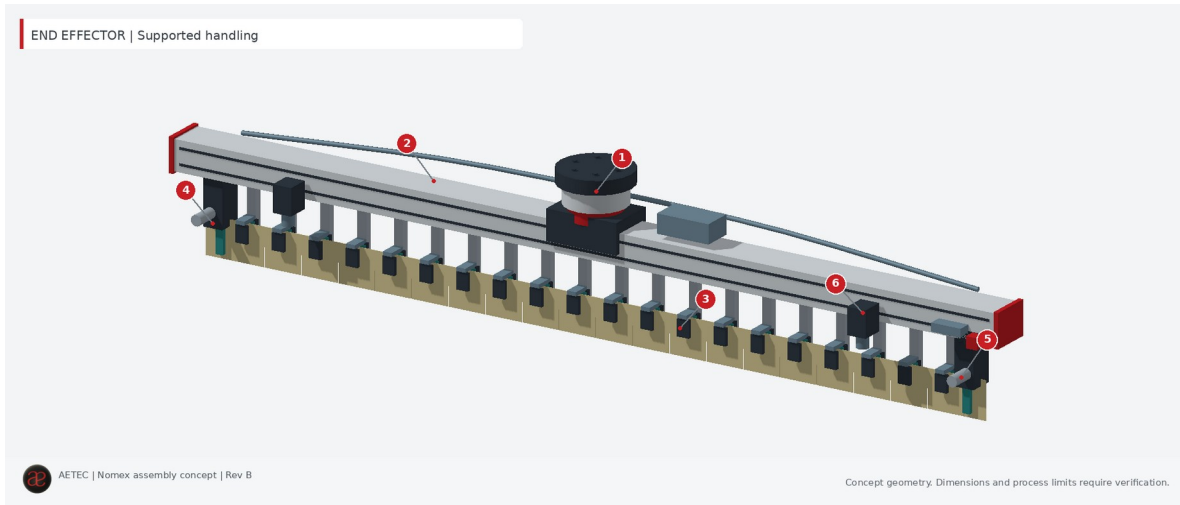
Assembled handling tool. The paper remains supported along the beam during wrist rotation.
